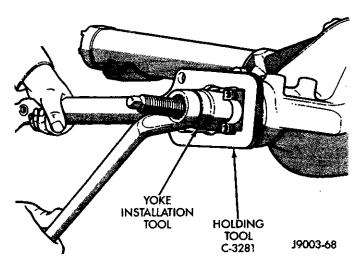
Drive Pinion Gear Shaft (Axle) Yoke Installation
